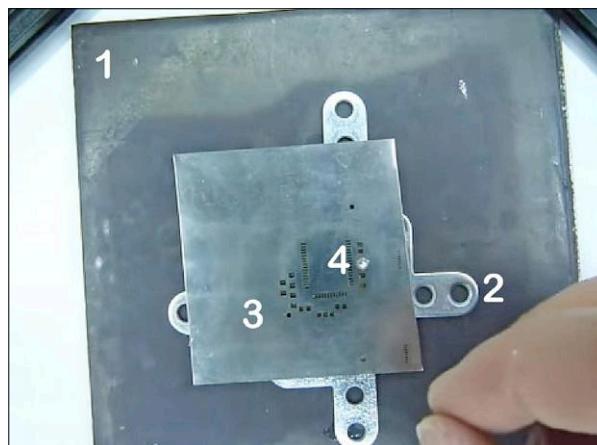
Screenshot from the video [2]: a magnetic sheet (1) four steel brackets (2) to hold the printed circuit board, then the stencil (3) and an aligning screw (4).
